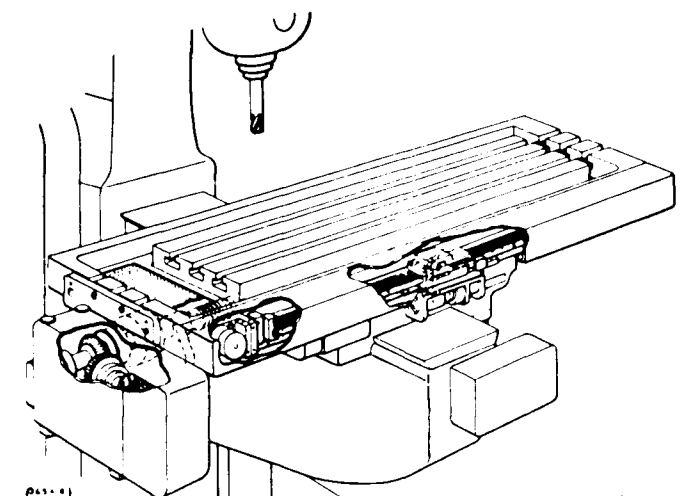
Drive unit and measuring equipment associated with one slide of milling machine (Ferranti).
